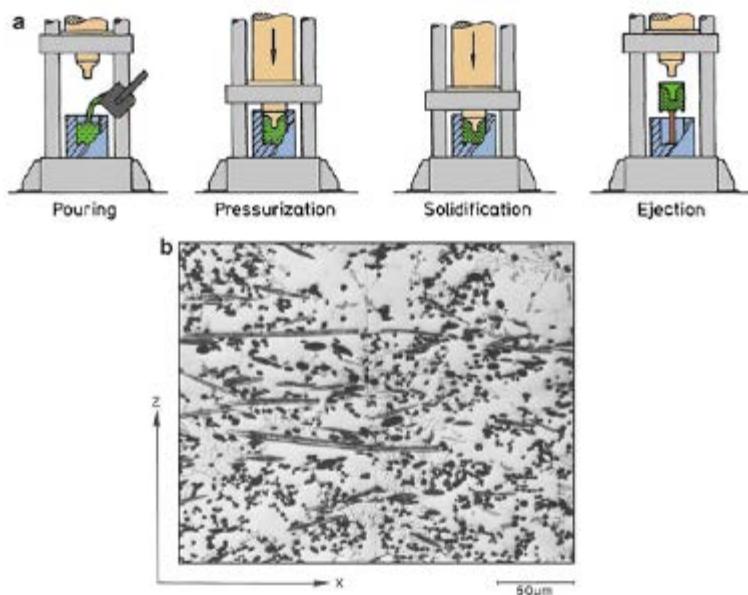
(a) Squeeze casting technique of making a metal matrix composite. (b) The microstructure of Saffil alumina fiber/aluminum matrix composite made by squeeze casting. [Courtesy of G. Eggeler]
